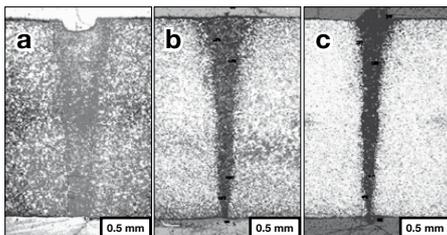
Variation of weld bead cross section geometry with increasing speed: a) laser power 575 W, welding speed 95 mm/s, focal plane -1.5 mm (below the surface); b) 500 W, 110 mm/s, -2 mm; c) 475 W, 120 mm/s, -1.5 mm.
